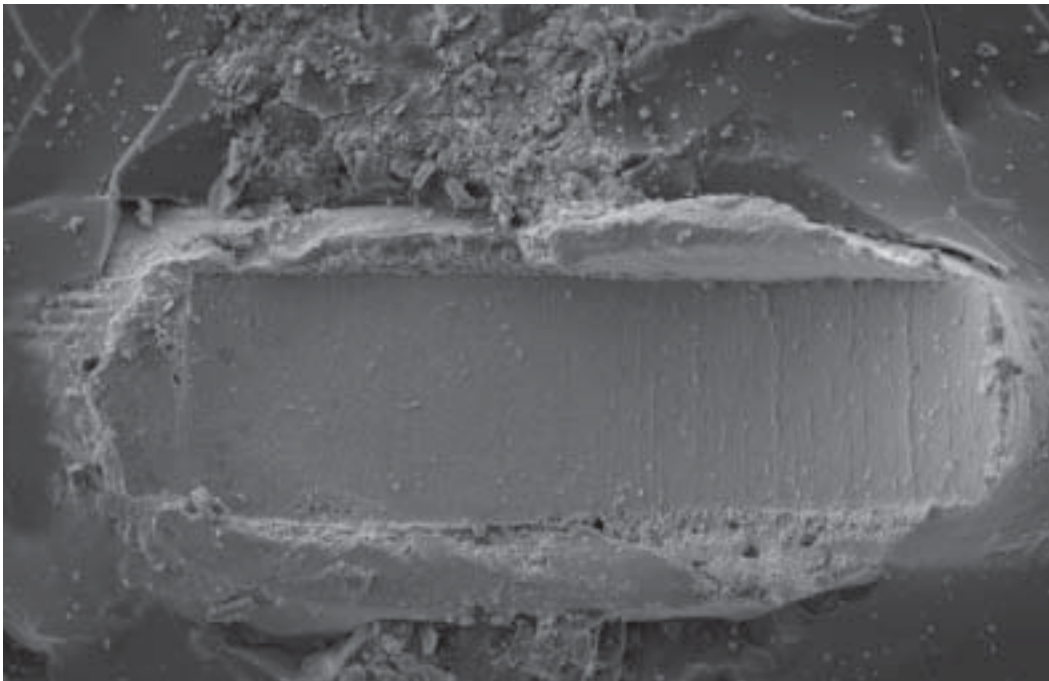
(Cont.) The Fracture Surfaces after Pull Test.
